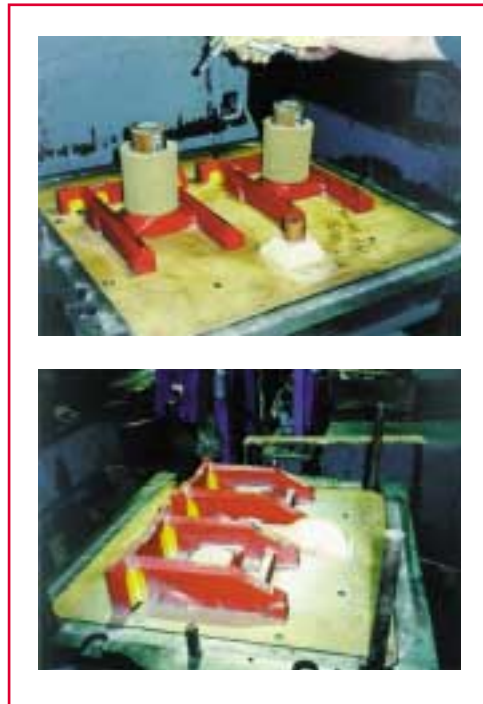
Cope and Drag patterns for 2-up oil tool casting
